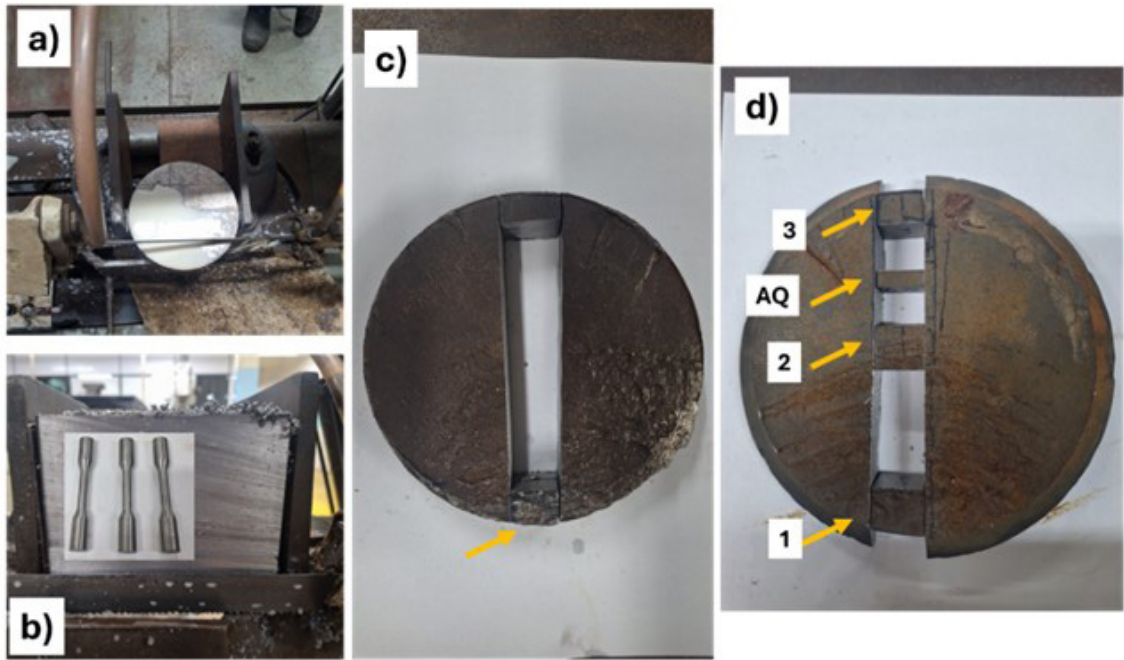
Images of the sample cutting procedures for mechanical testing and failure analysis: a) Beginning of refrigerated cuts on the samples, b) Region used for the preparation of tensile and impact test specimens, c) Removal of the fracture face from the SSSP for microstructural examination, and d) Fractured face of the ISF for fractography, samples 1, 2 and 3, and chemical analysis (CA).
